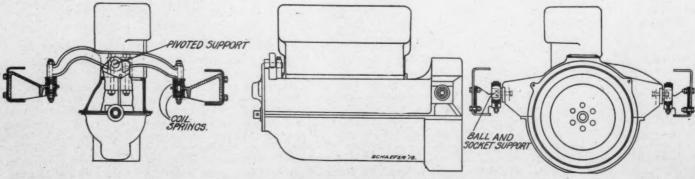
Three Views of the Patented Mounting on the Signal Truck
